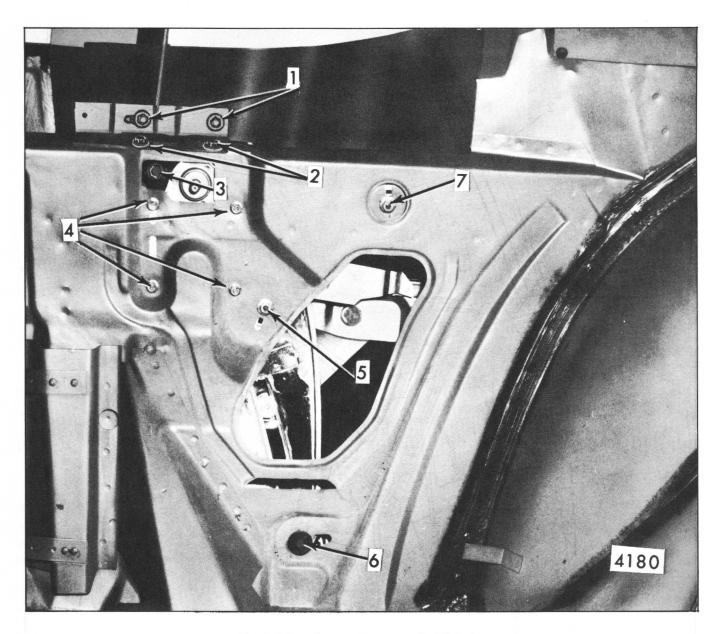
Rear Quarter Hardware - "E-67" Styles
